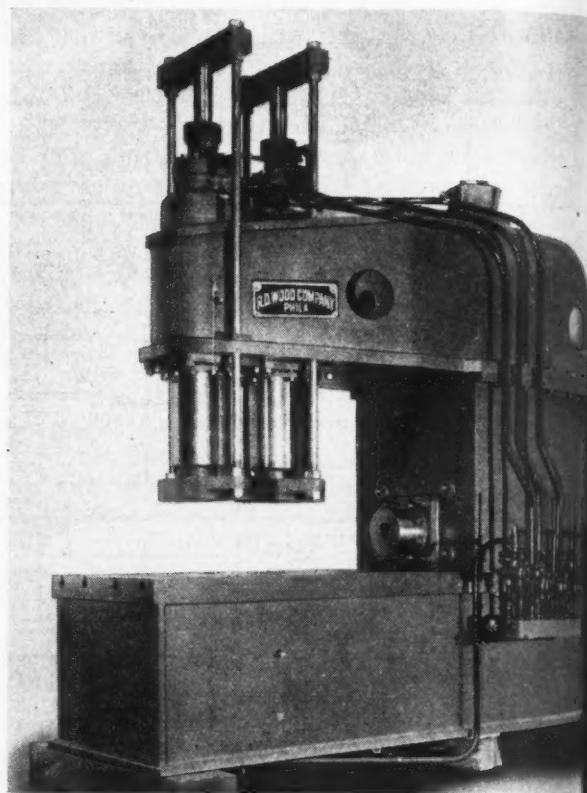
Typical of industrial hydraulics applications is this 300-ton sectional flanging press, with control valves grouped on right side
